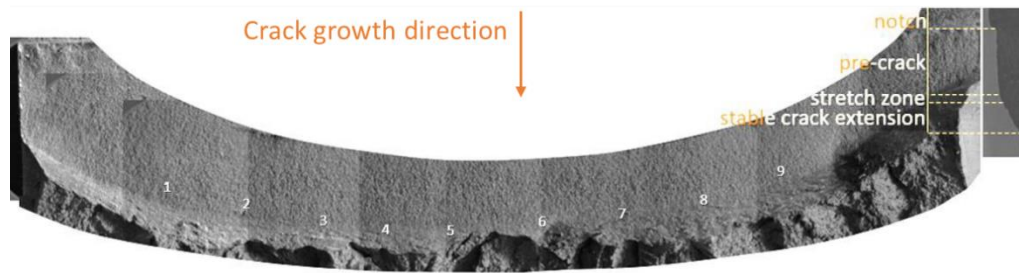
An example fracture surface which indicates 9 measurement points of notch, fatigue pre-cracking, stretch zone and stable crack extension [65].
